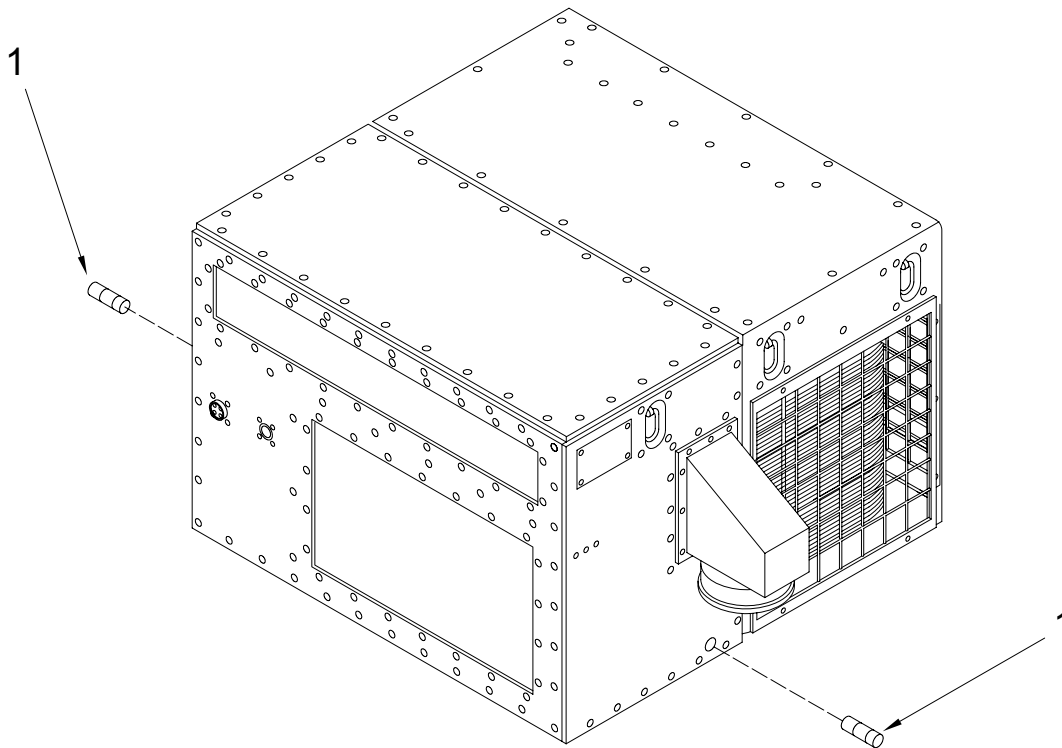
DRAIN PLUG REMOVAL/INSTALLATION.
